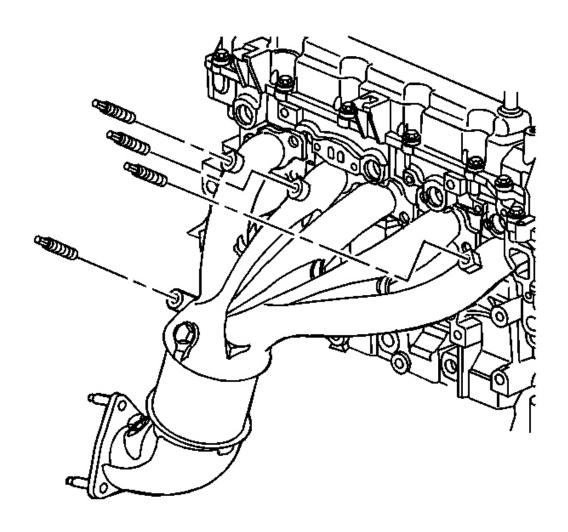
View Of Exhaust Manifold Studs Courtesy of GENERAL MOTORS CORP.
